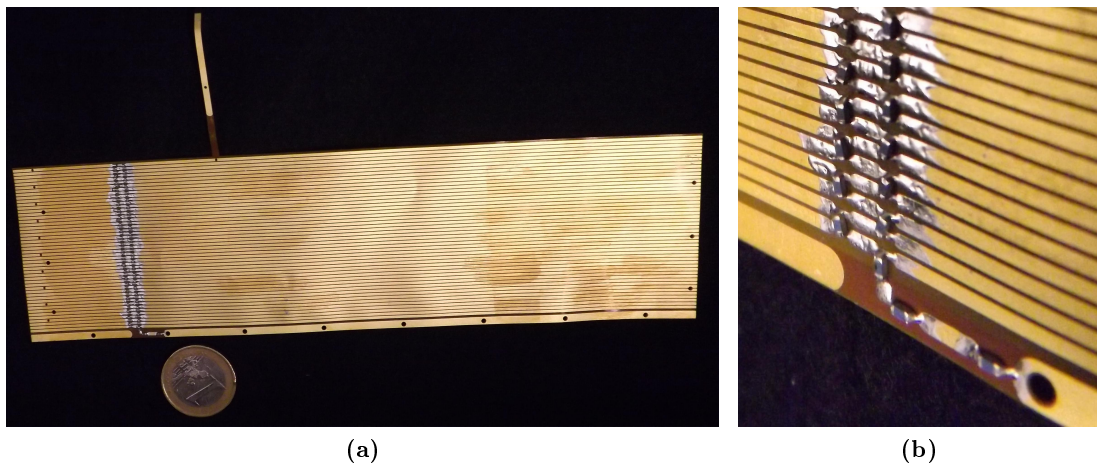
Electric field cage: A flexible PCB with parallel conduction lines as displayed in (a) is wrapped to a cylindrical shape. In this picture, a broader, lower conduction line can be seen at the lower edge of the PCB. This line provides the connection to the cathode mesh. The latch on the upper end is connected to the gate mesh voltage supply. The potential difference between the conduction lines is provided with resistors shown in (b). The field cage layout was developed in [69]. The resistor configuration, especially in the lower part visible in (b), is according to simulations from [3].
